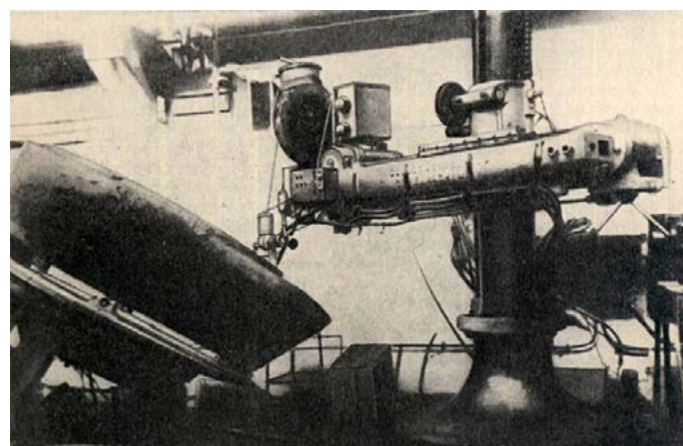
Submerged arc welding of a ring for a T-34 tank turret using a column and boom station [16]
